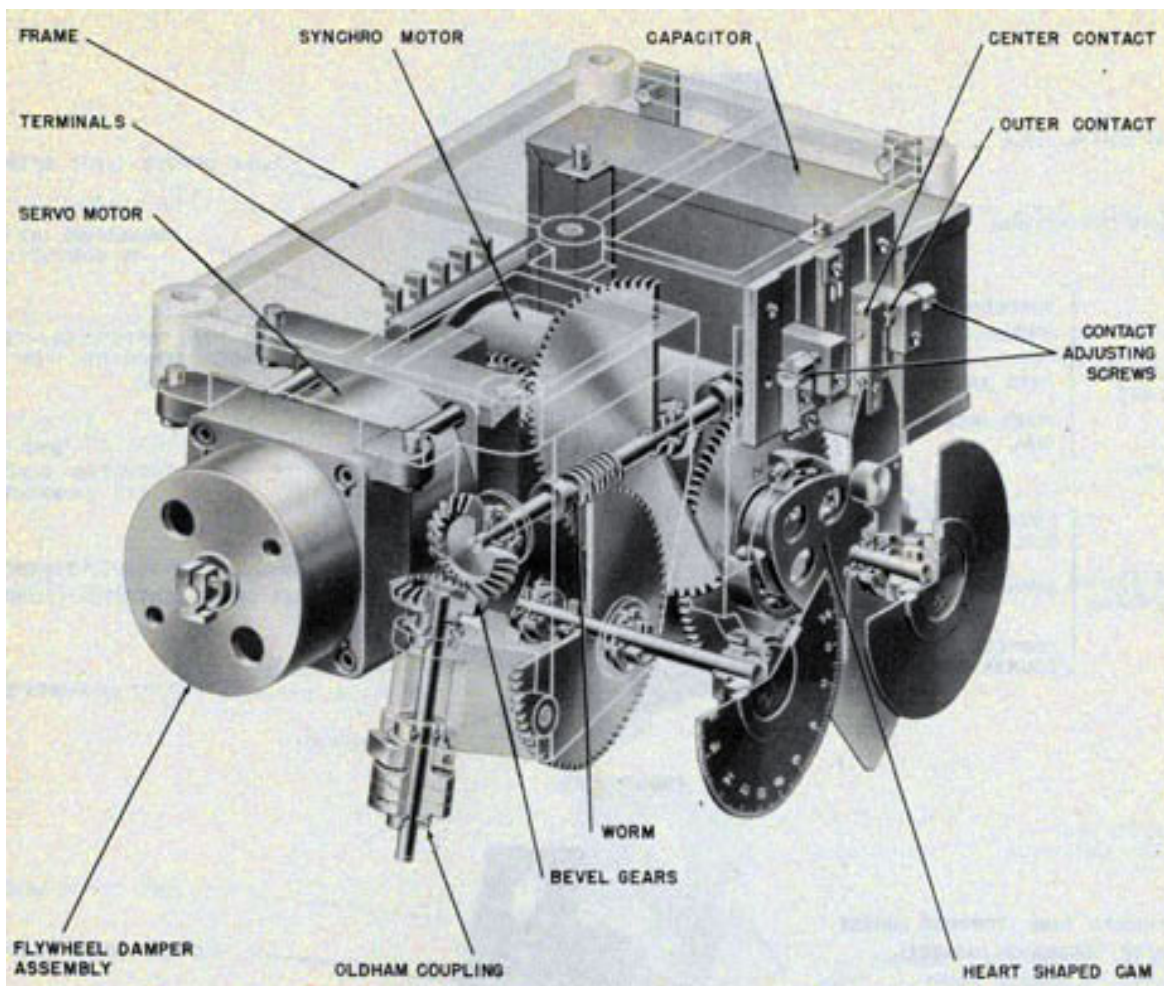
Cutaway of own ship course assembly showing heart-shaped cam, follow-up switch, dials gearing servo motor and capacitor.
